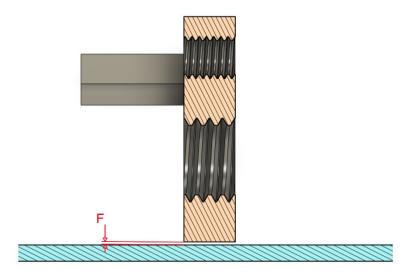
ACTUATOR HOLDER & ACTUATOR HOLDER GUIDE FIT REFERENCE
